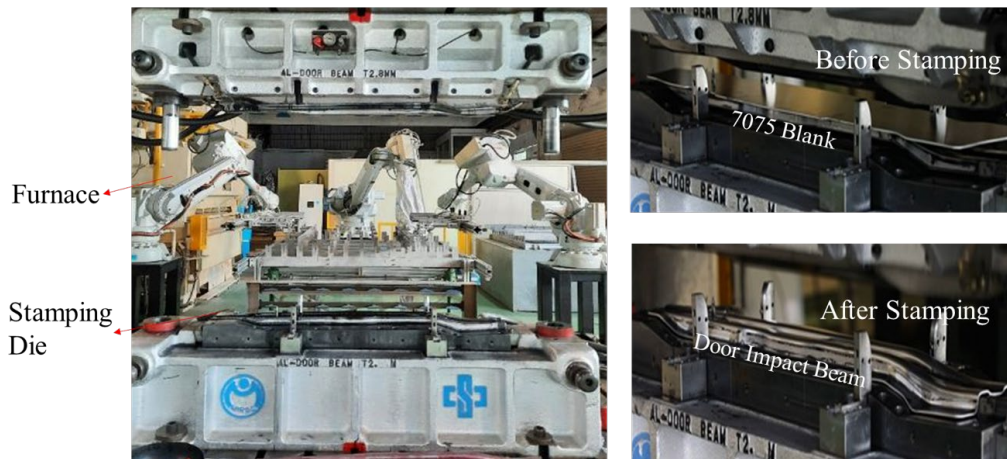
Stamping die for the 7075-door impact beam hot forming.
